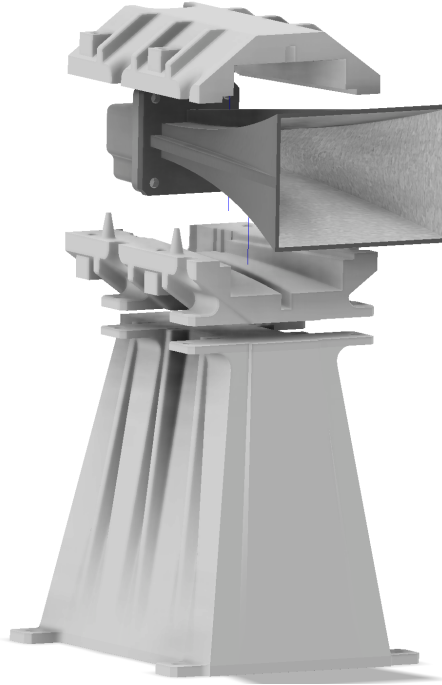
Exploded view of the feed horn mount. The mount parts are made from 3D printed PLA.
